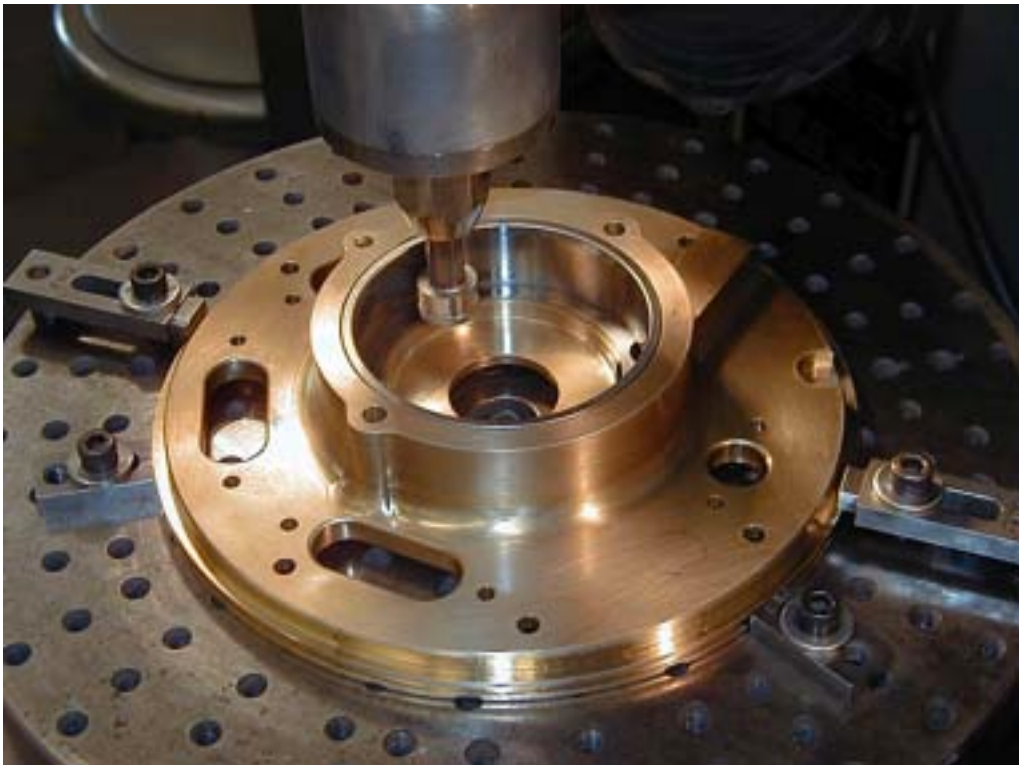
Internal grinding. In this photograph, the INTERNAL GRINDING WHEEL is the small cylindrical object projecting downwards from the vertical spindle into the internal recess in the workpiece. The workpiece is mounted on a circular table. Depending on the construction of the machine, the table and workpiece may rotate slowly so that the whole of the internal recess is progressively ground by the wheel, or the table might remain stationary with the spindle and wheel moving in an annular path to grind the whole of the internal surface.
